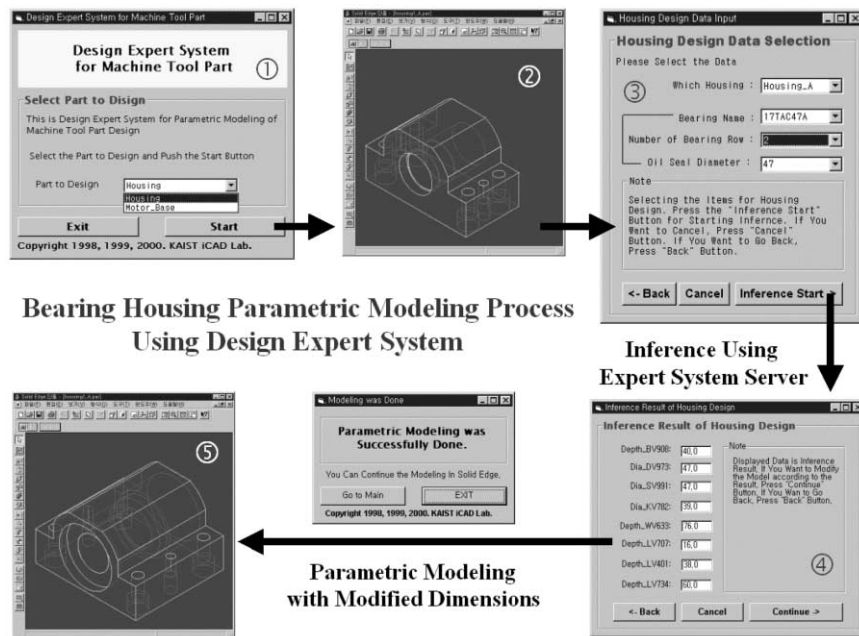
Parametric modeling process of bearing housing using the design expert system.
